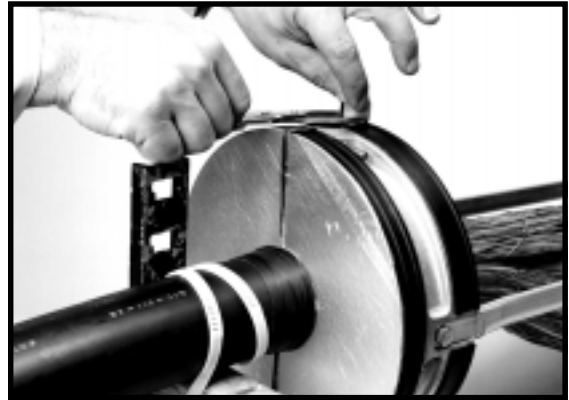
TRIMMING EXCESS LOCK-TAPE STRIP
